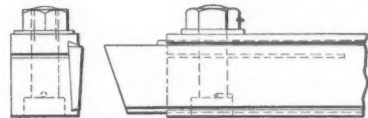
Split Tool-holder for carrying Cutting-off Tool.
